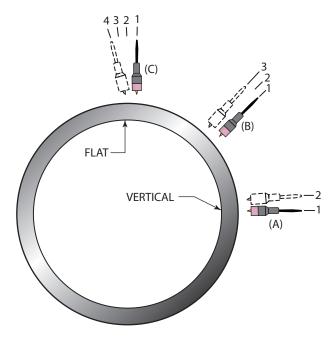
Counting to oneself is one way of setting the welding rhythm. As the weld progresses from vertical (A) through (B) to flat (C), the rhythm slows and the torch angle changes.
